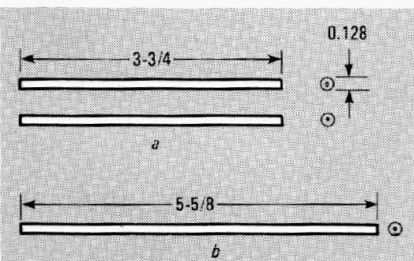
SHAFT DIMENSIONS. Two sets of three shafts are required.
